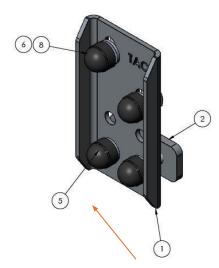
The above Plate with threaded holes is inserted into the below rail inside the Load Bin
